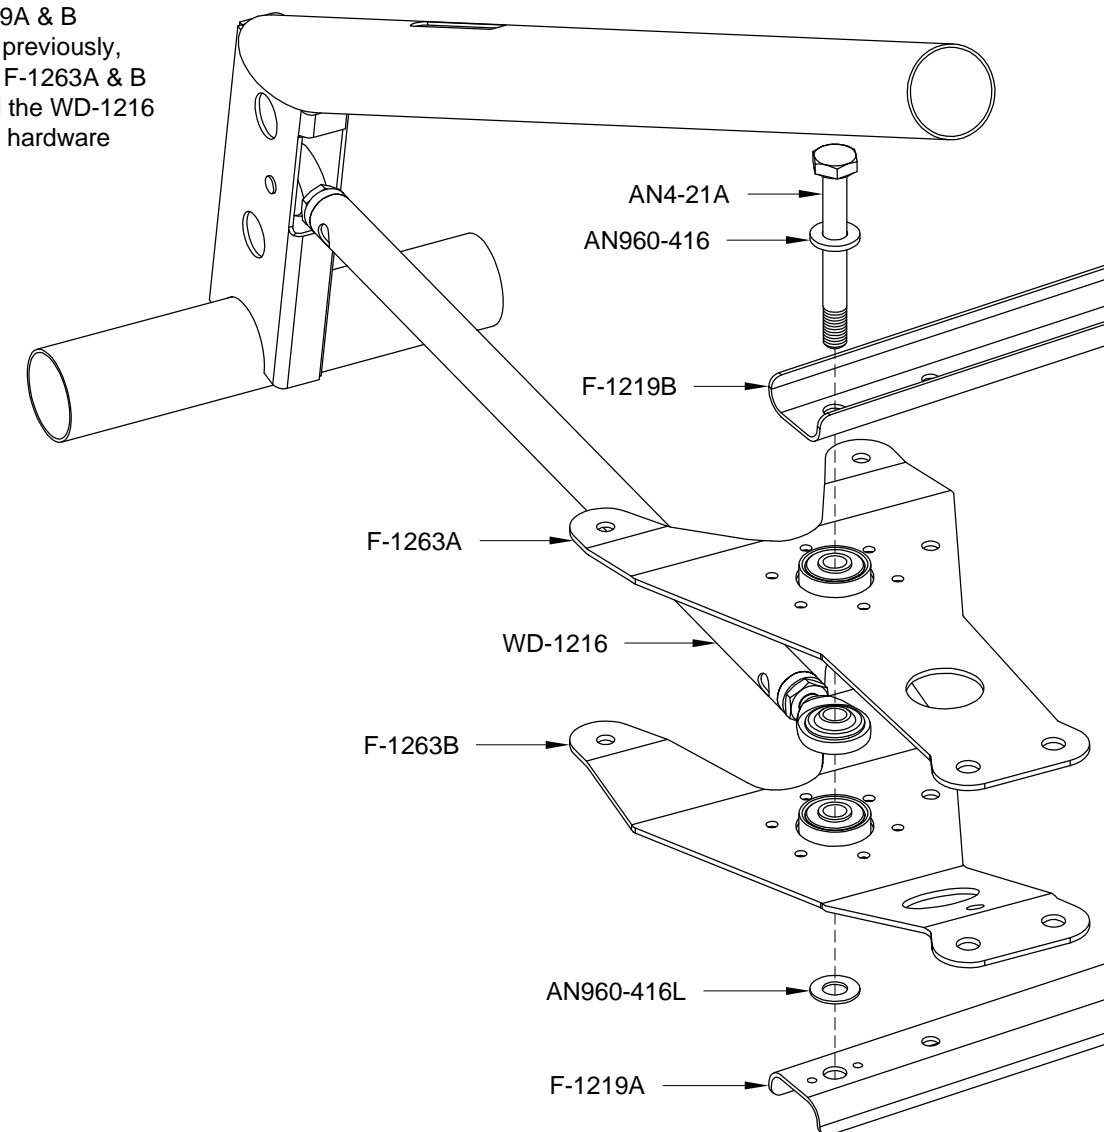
ATTACHING THE FLAPERON MIXER BELLCRANKS
